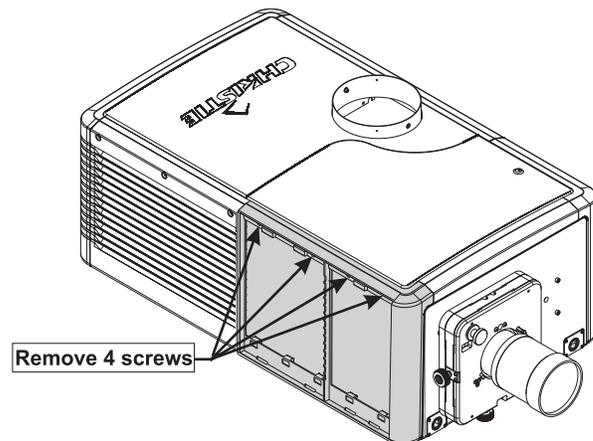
REMOVE ACCESS PANEL FRAME
